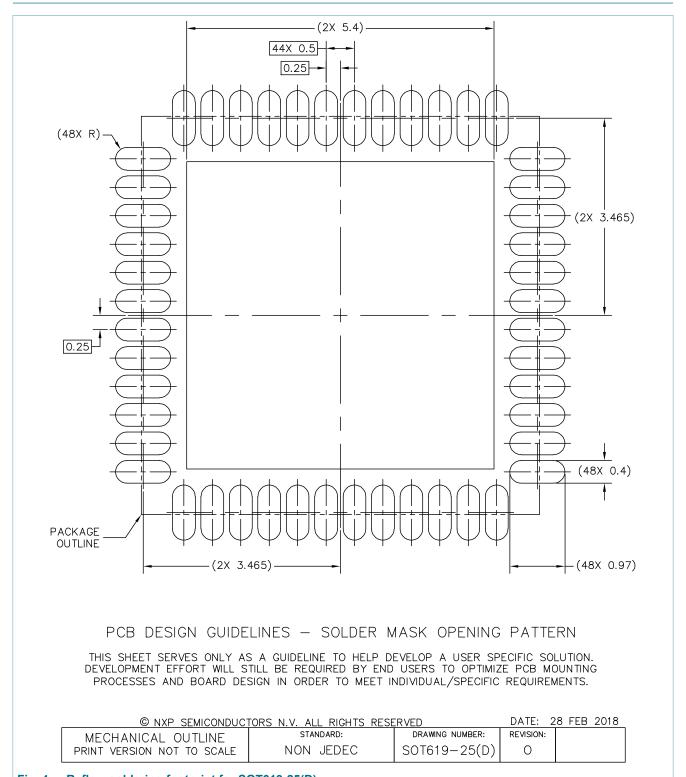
Reflow soldering footprint for SOT619-25(D)
